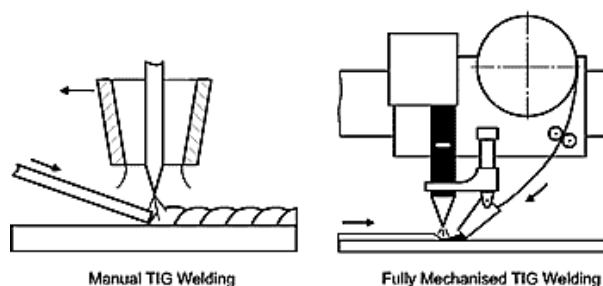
The manual and fully mechanized TIG welding processes.[4]
